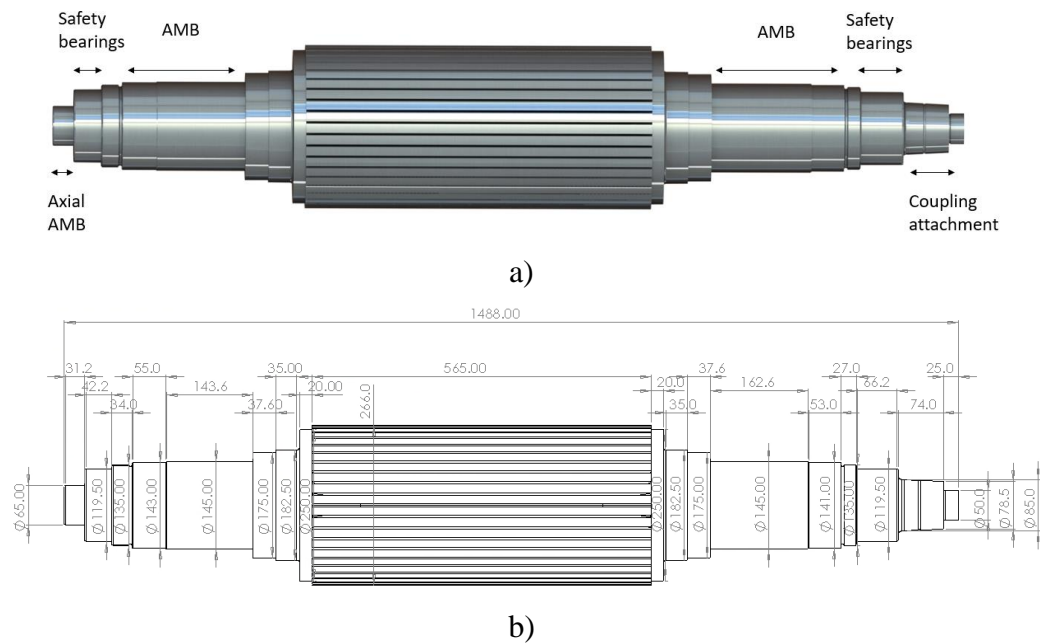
a) Case study rotor. b) Dimensions of rotor.
